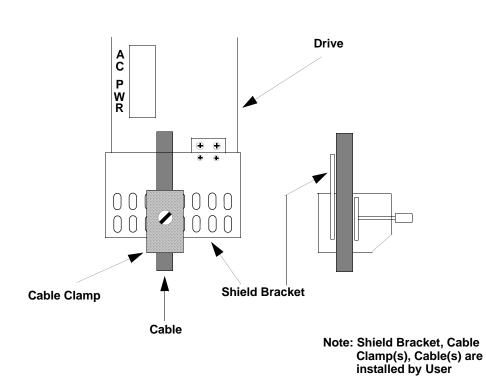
Terminating Power Cables for 460V SDN Drive
